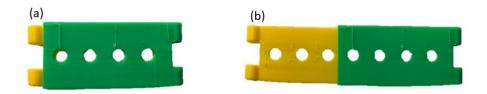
Adjustable beam section of the wheelchair attachment
